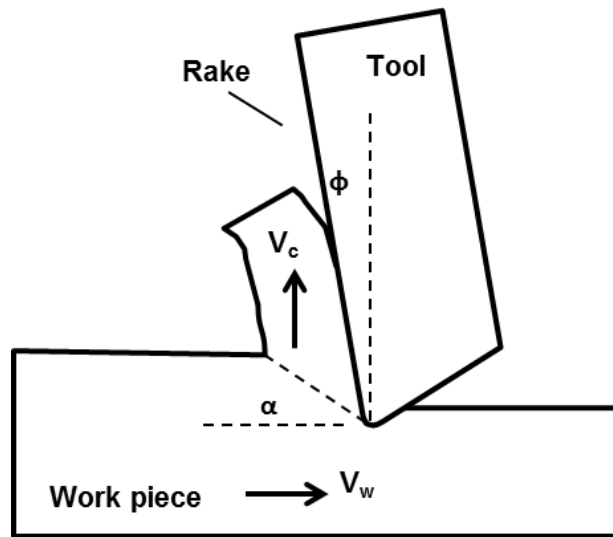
Shear Angle Relation to Chip and Workpiece Velocity
